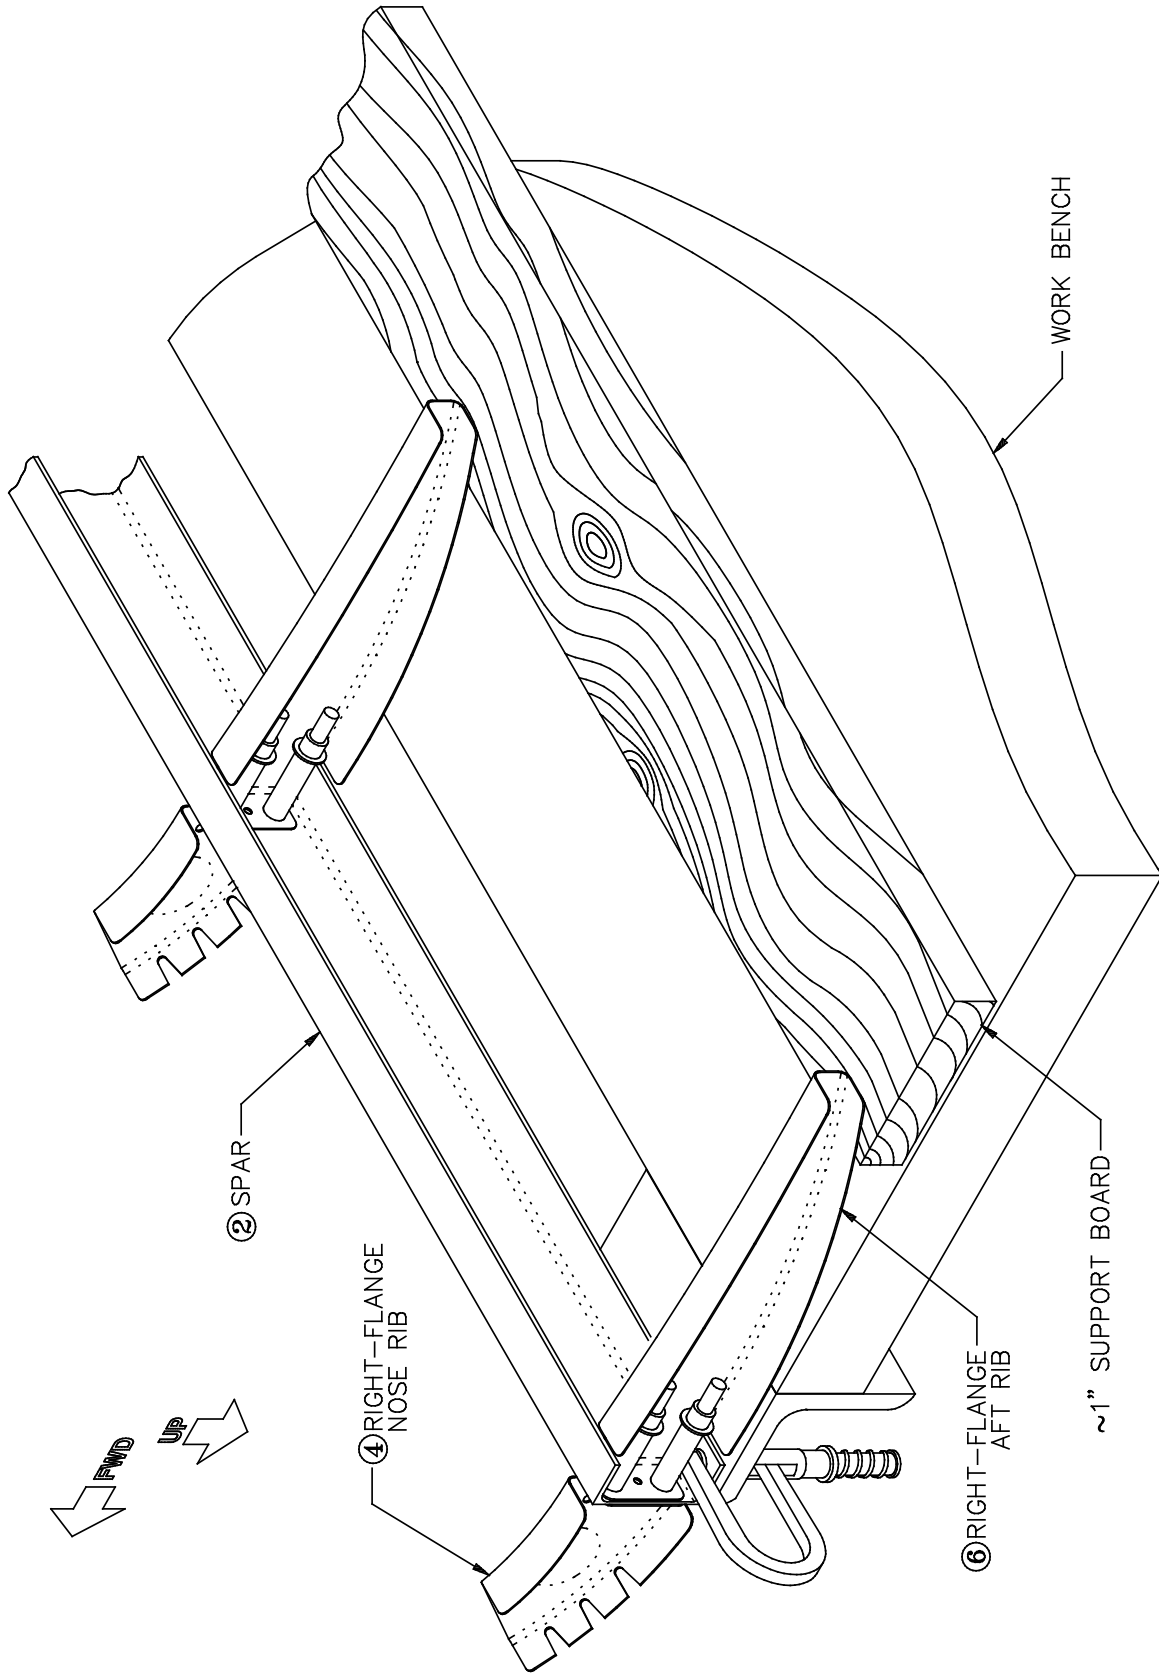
Clamping the Spar/Rib Assembly to the Bench
